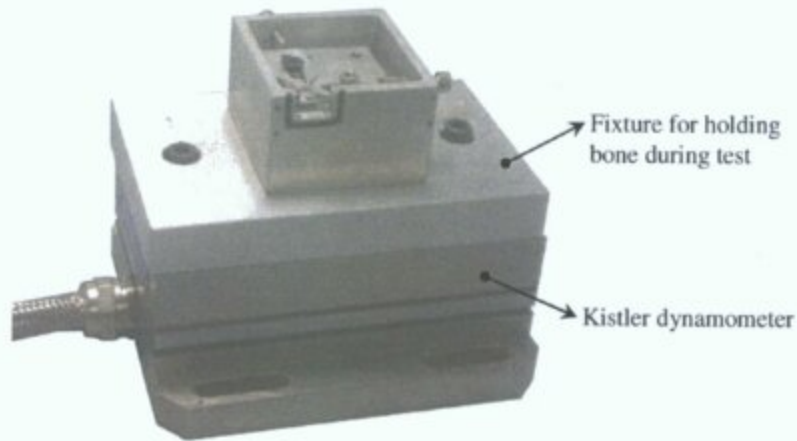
Bone-holding fixture mounted on Kistler dynamometer
